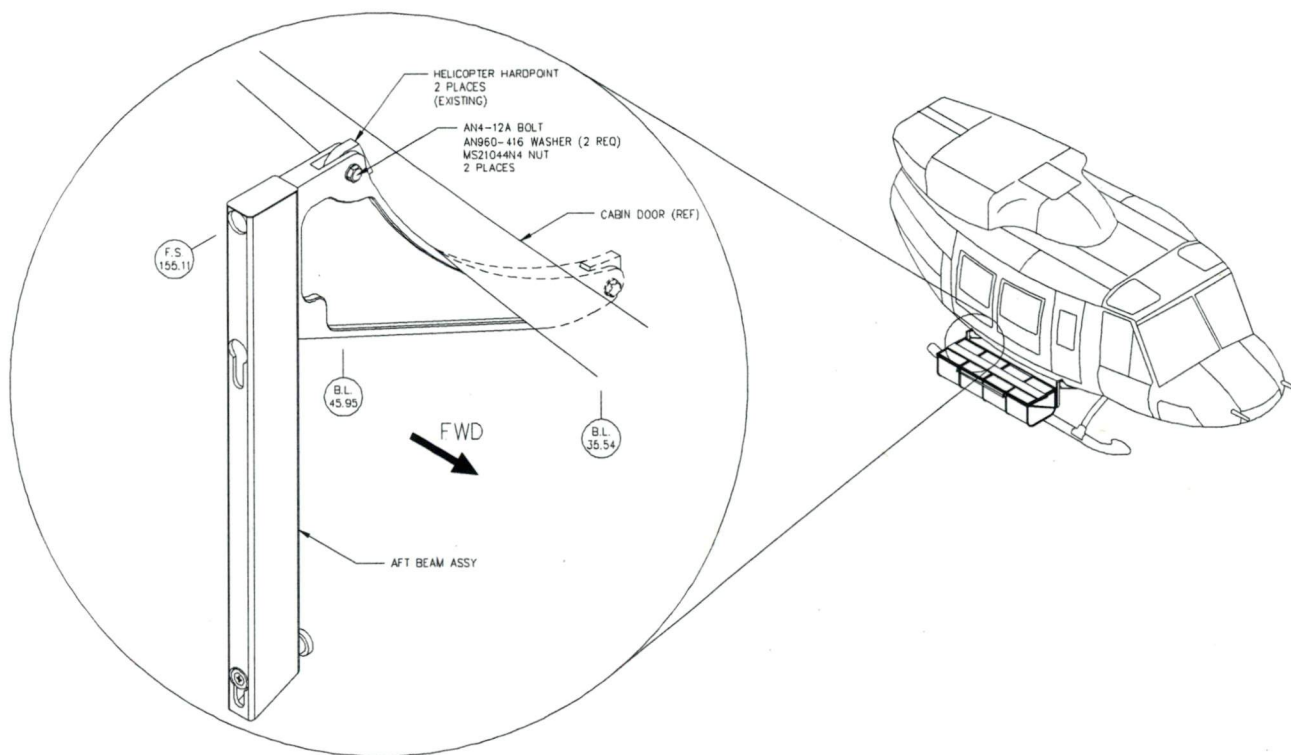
Attachment Provisions Installation (75102 Configuration)
